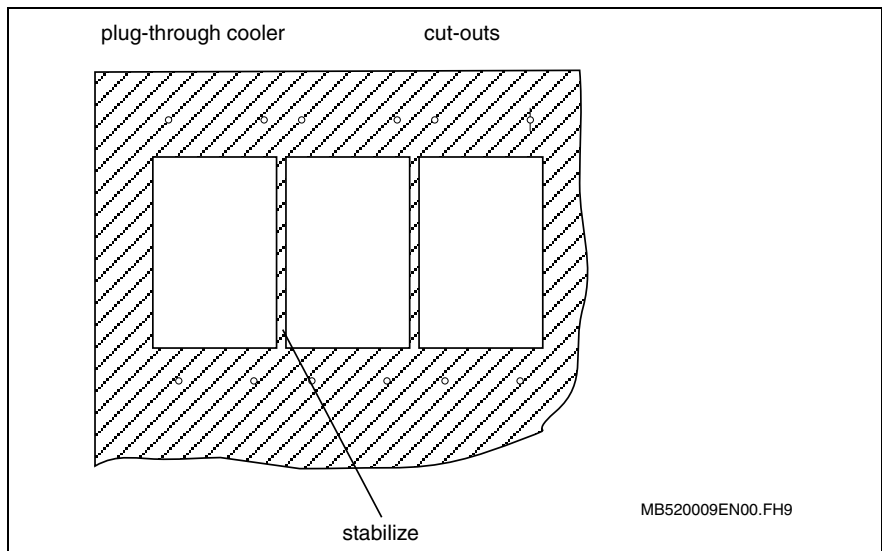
Cut-outs for devices with plug-through cooler
